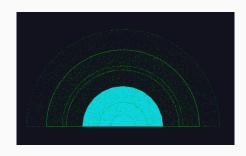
Sketch of the shape from the rear of the Aluminium Shield.
